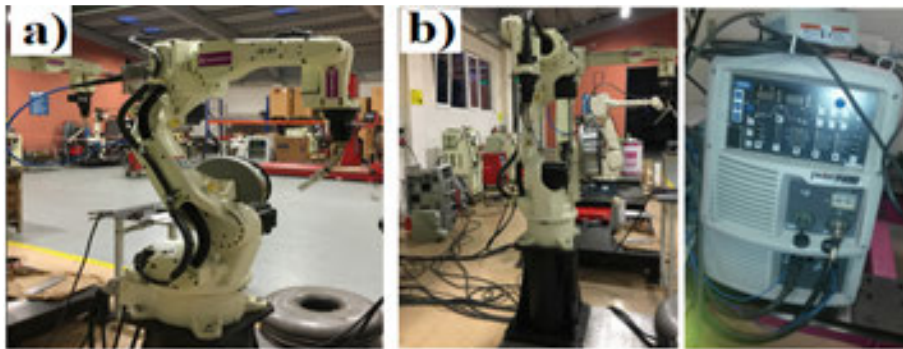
a) The welding robot and b) GMAW machine used in the study
